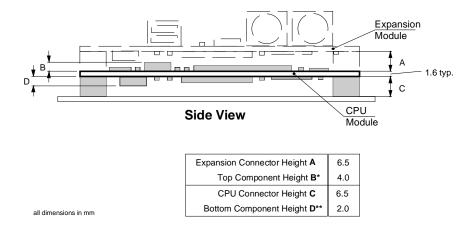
EXM32-Au1250 CPU Module mechanical dimensions
